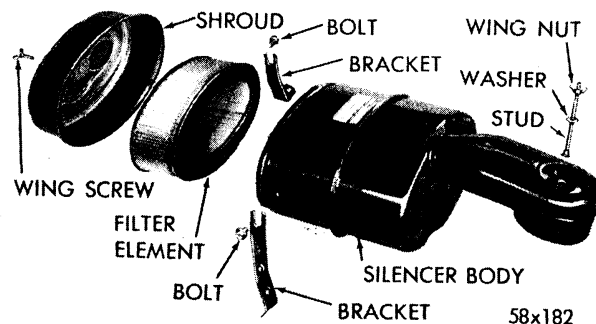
Carburetor Air Cleaner (Disassembled View)
